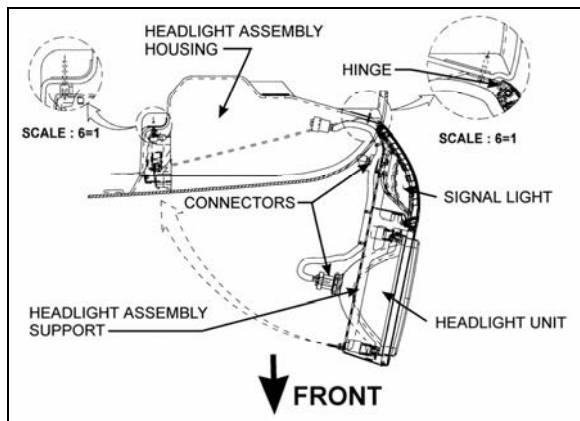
TOP VIEW OF HEADLIGHT ASSEMBLY 06421
